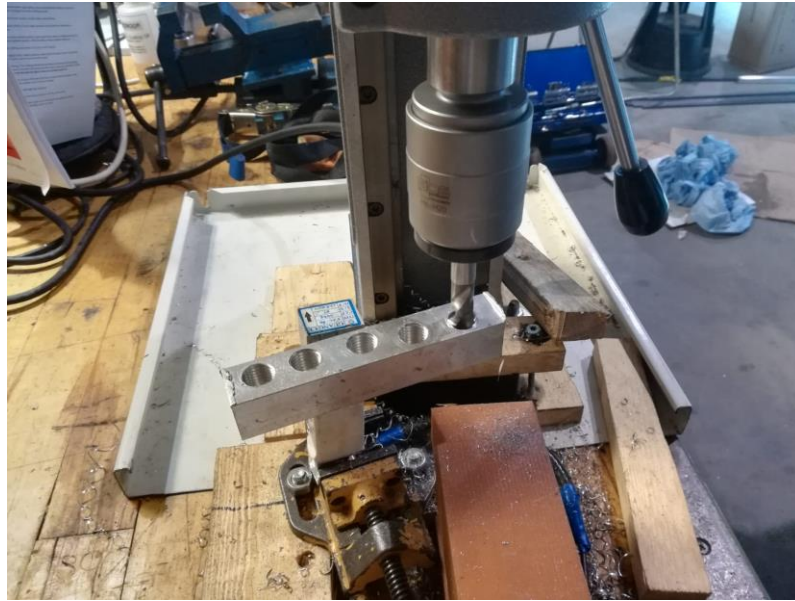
Lack of bottom support frame for a tapped workpiece in the experimental setup
